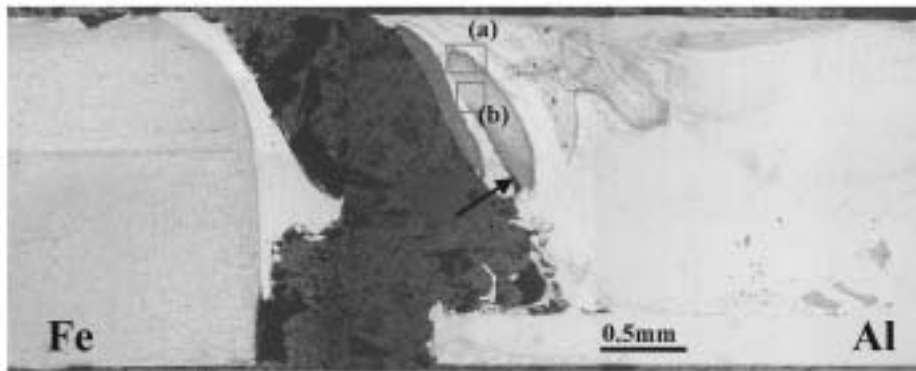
Cross sectional view of the broken part of the joint after tension test. It is seen that fracture occurred along the interface between steel fragment and aluminum matrix.
